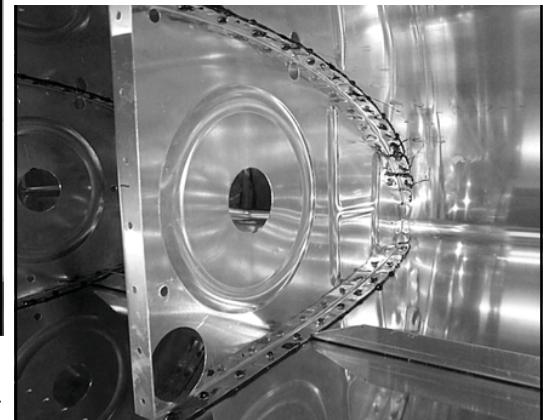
An interior fuel tank rib, riveted and sealed.
